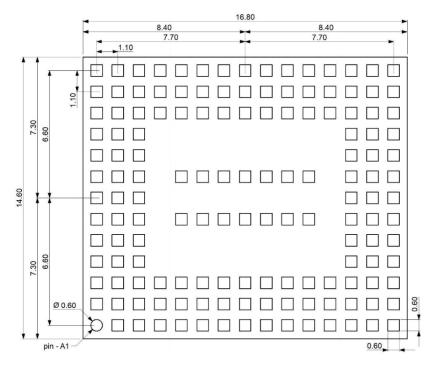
IRIS-W101 recommended PCB footprint (top view)
